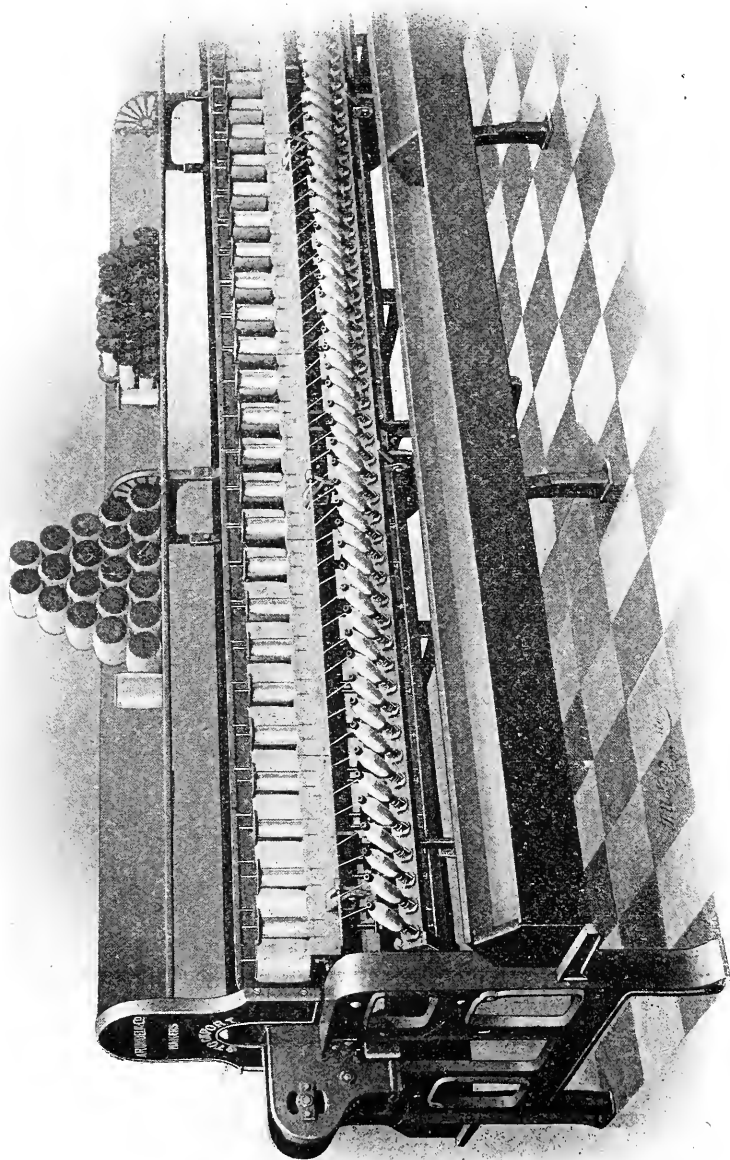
Upright spindle winding frame, with creeper motion for taking away empty bobbins.
